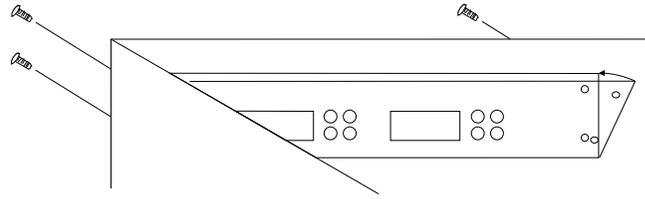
Installing “standard” line card face plate (view from inside chassis)
